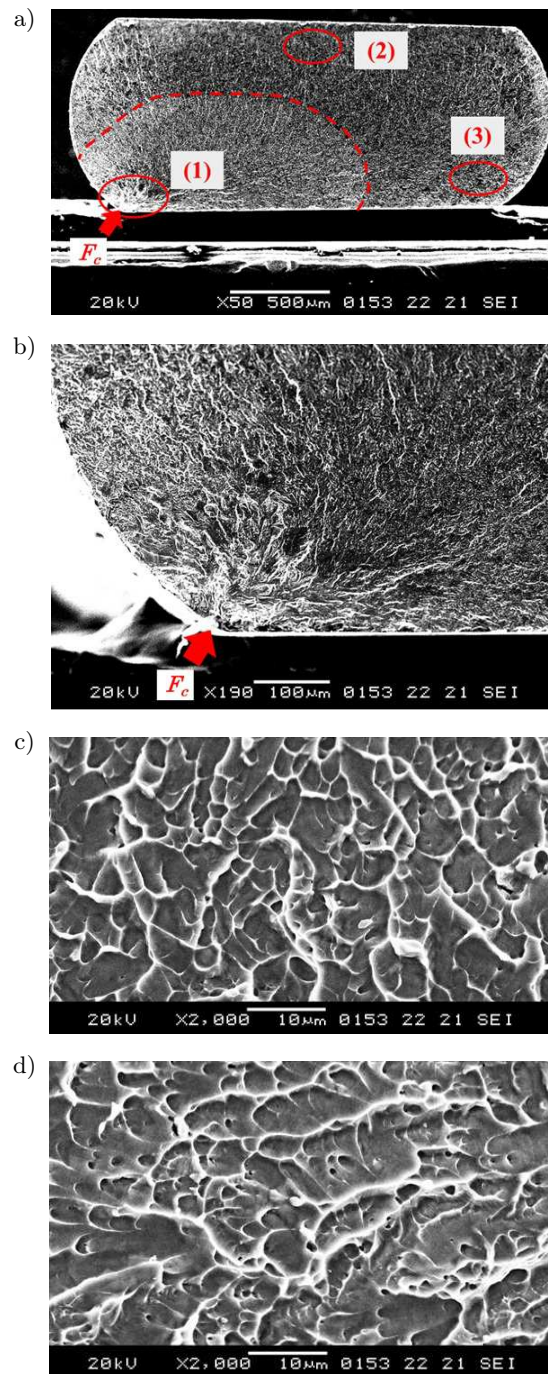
SEM photographs of the typical fracture surface of ion-implanted tape with  $2.5 \times 10^{18}$  ions/cm<sup>2</sup> for  $\varepsilon_a = 3.12\%$  and  $N_f = 6018$ : a) whole fracture surface, b) crack initiation part (1), c) central fracture part (2), d) final fracture part (3).
